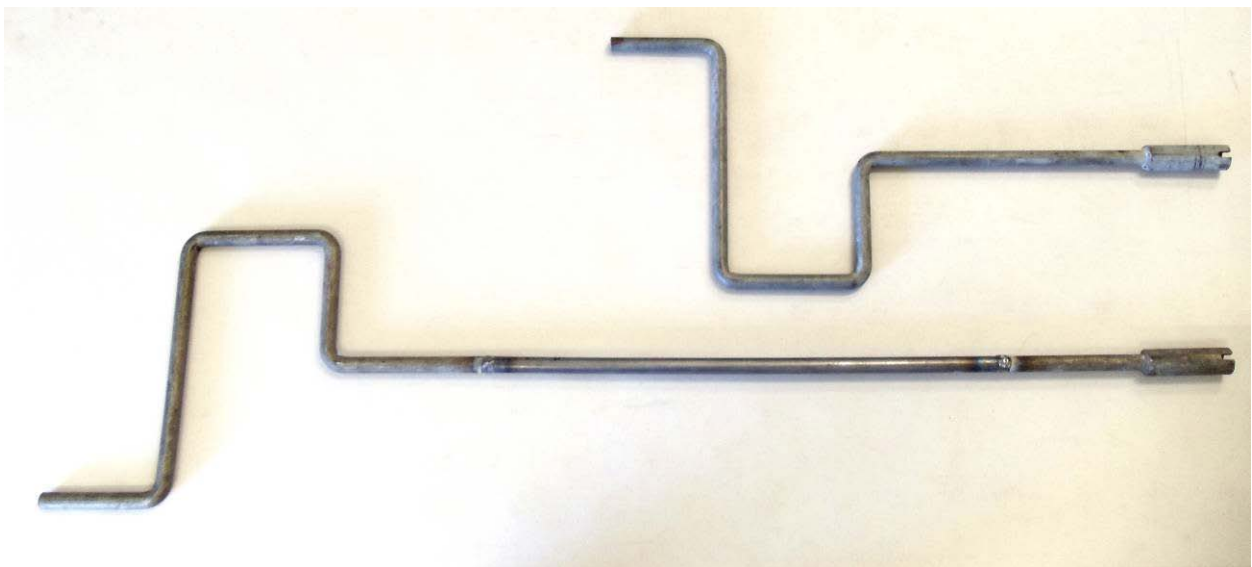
Factory Racking Handle with two foot extension welded on
